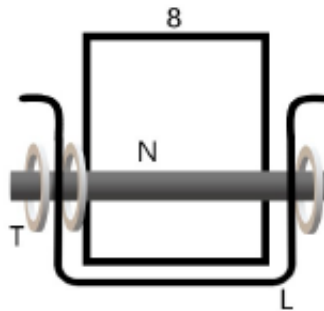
To prevent pinching the coupler while tightening, use an extra 19mm flat washer (T) threaded onto the 3-inch bolt (N), between the tongue (8) and the coupler (L).
